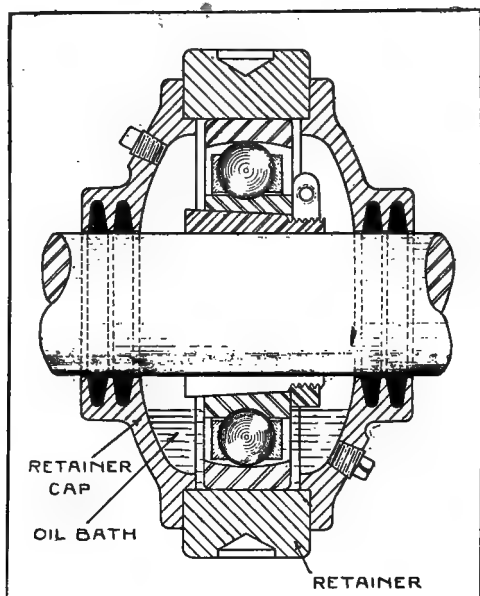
Sectional View of New Departure Ball Bearing Shaft Hanger Box.
